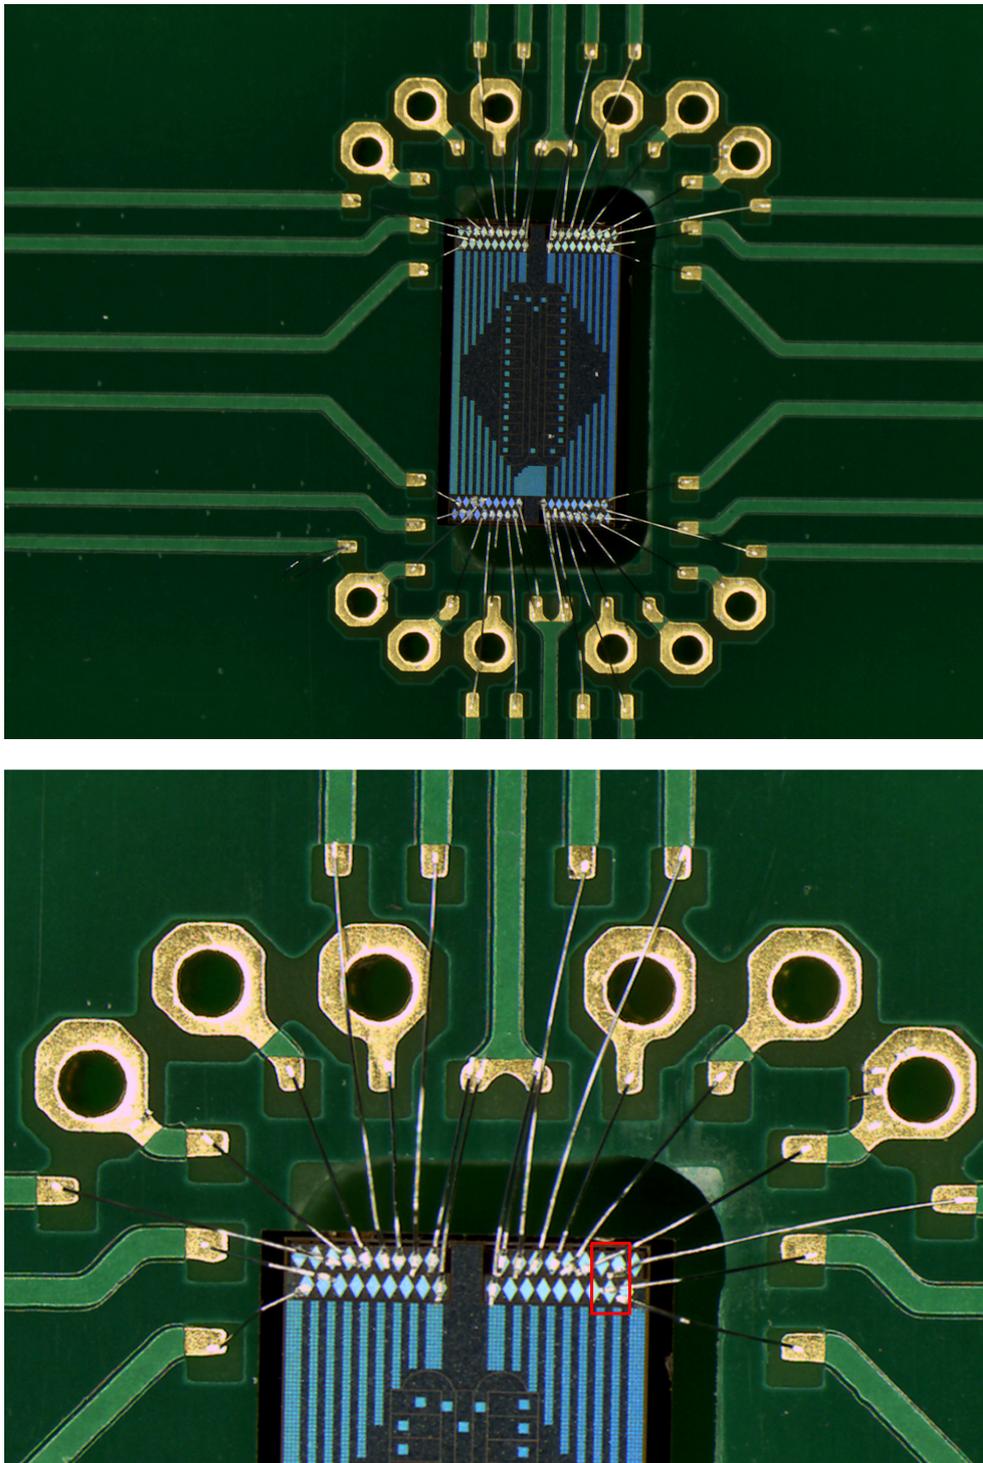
CMOS trap wirebonded to the testing PCB. Image taken under a light microscope. The lower picture zooms into the upper half of the chip, and the two bonding wires mistakenly connected to the same electrode is indicated by the red rectangle.
